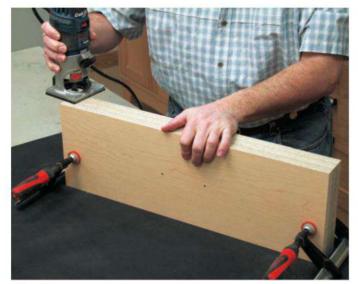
Rout a 1/8" radius on the corners of the drawer faces (pieces 7). Clamping the drawer faces together and gang routing them like this makes supporting the router much easier.
